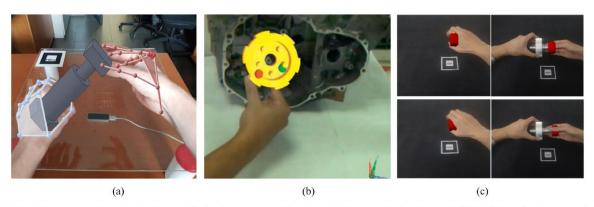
Hand Gesture-aware interaction in AR assembly. (a) Gesture-aware with the Leap Motion controller for AR assembly [131]; (b) Bare-hand aware workpiece manipulation [37]; (c) Occlusion-aware bare-hand interactive AR assembly [126].
